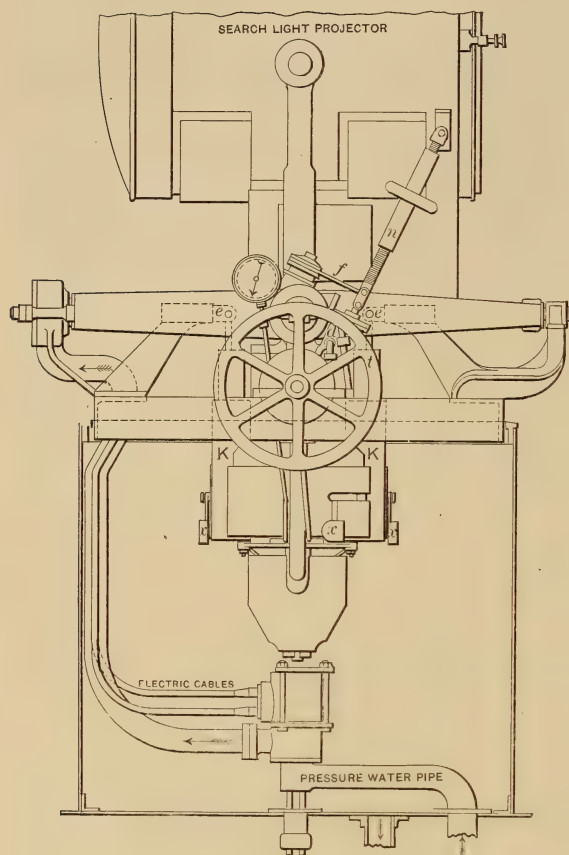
ELEVATION OF A STEADY PLATFORM.
